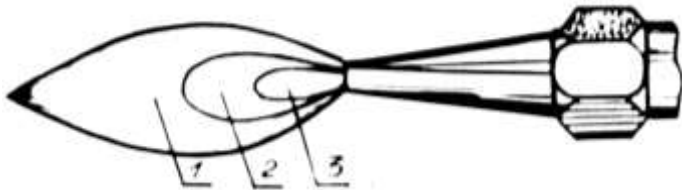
Welding flame: 1 – tongue; 2 – welding (middle) zone; 3 – core
